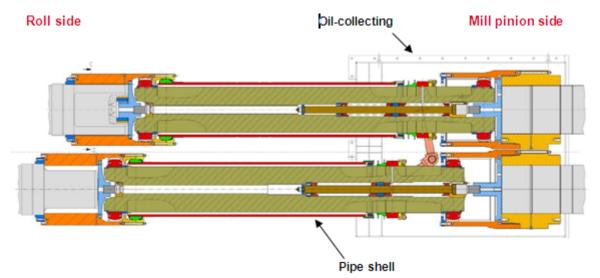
SIEFLEX® Oil Lubricated Tube Spindle for Hot Strip Mill.
